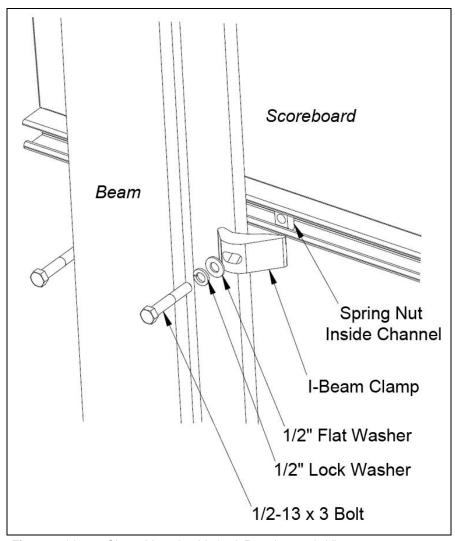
I-beam Clamp Mounting Method, Rear Isometric View
